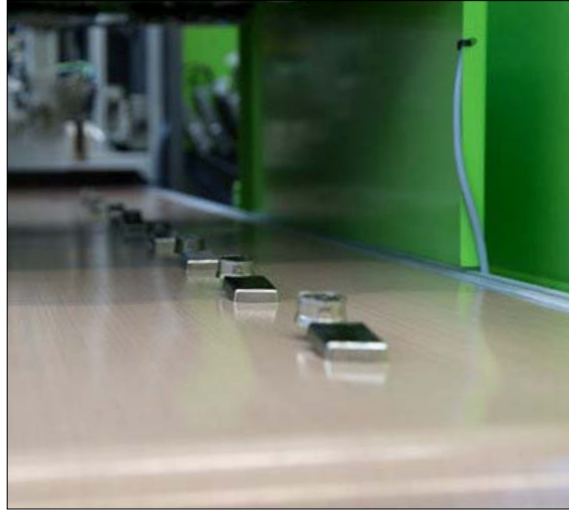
Engel injection moulding machine parts conveyor belt with integrated cooling fans
